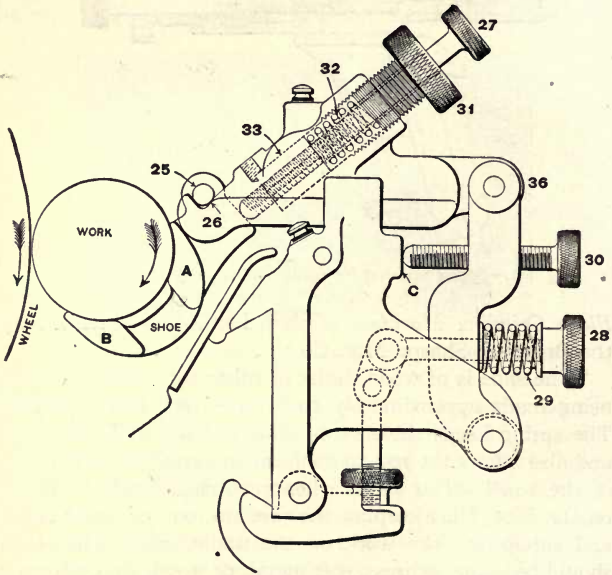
Universal backrest for Brown & Sharpe grinding machines.
